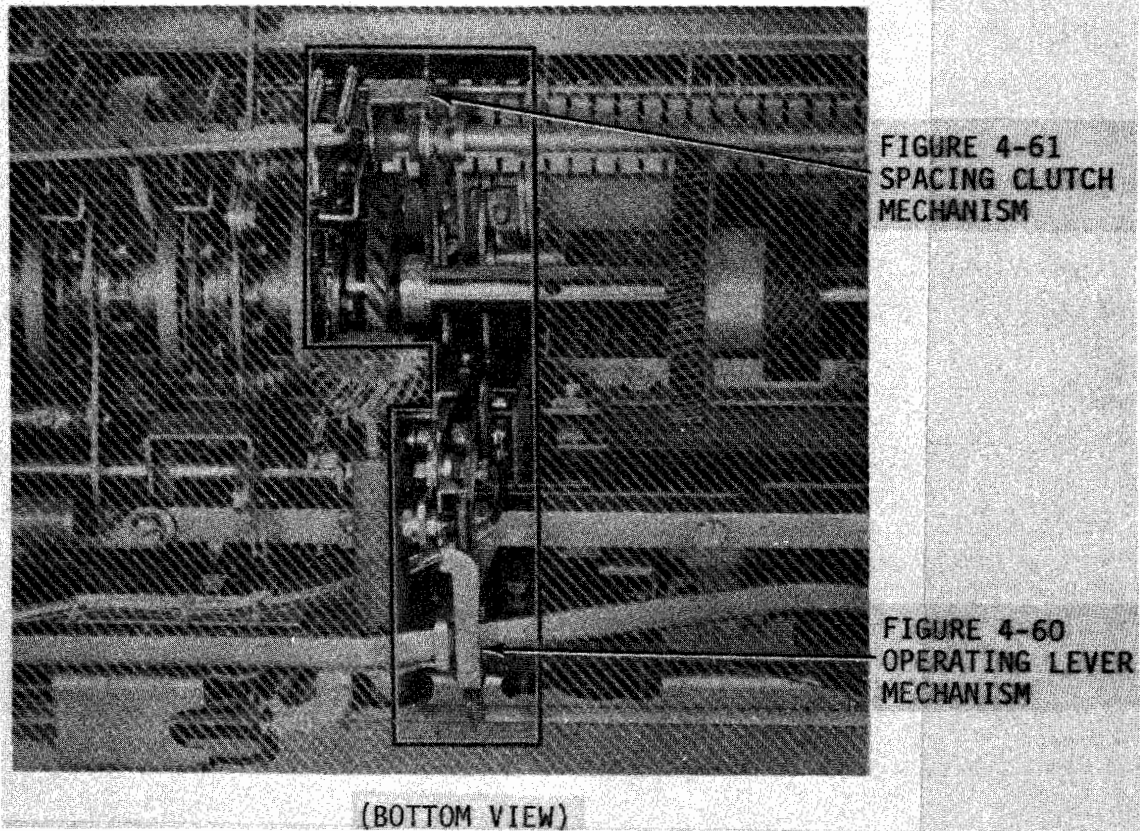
Horizontal Tabulator Mechanism (Early Design)
